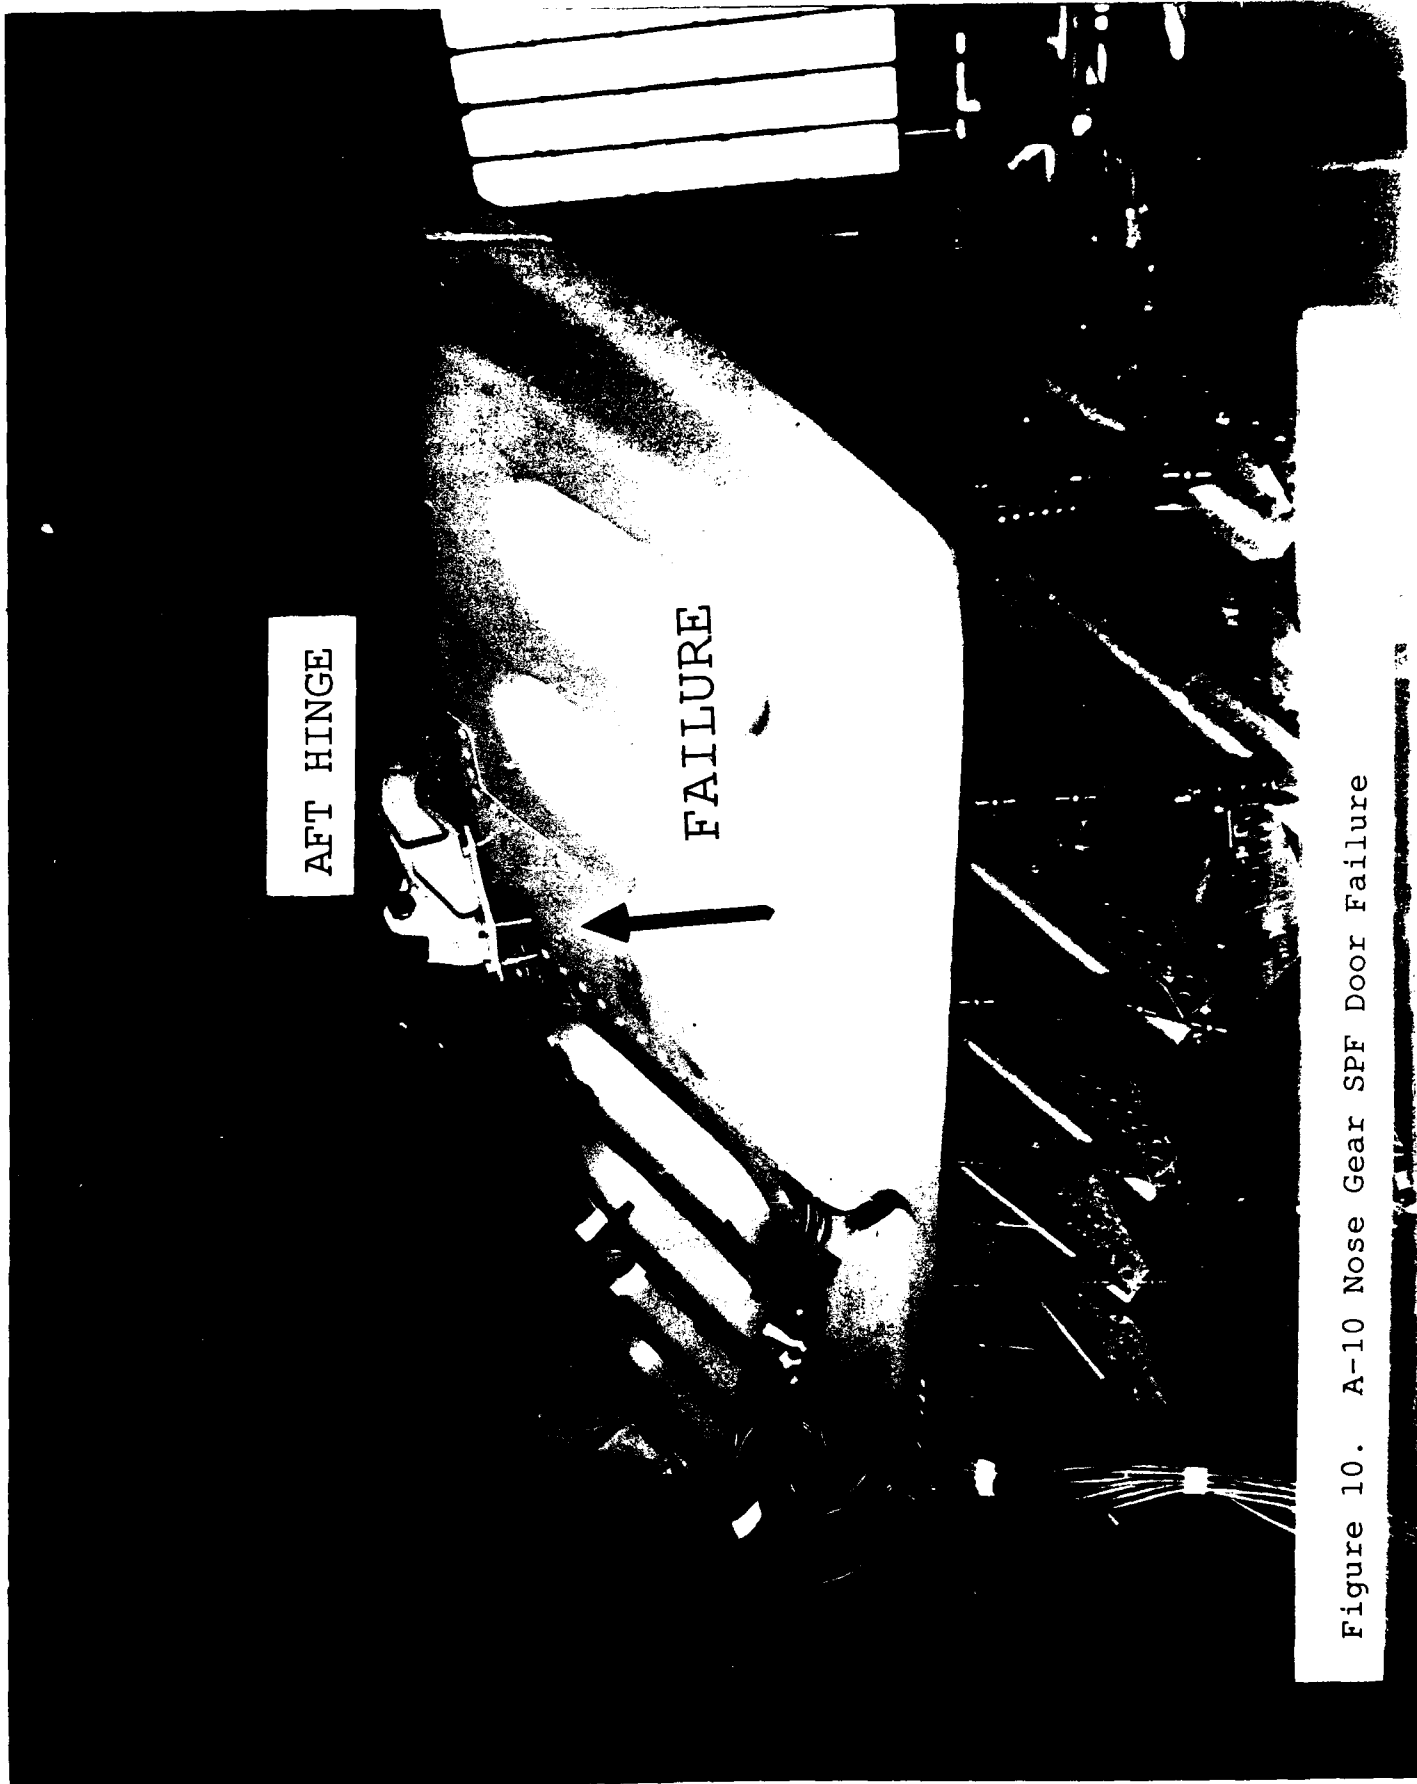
A-10 Nose Gear SPF Door Failure
